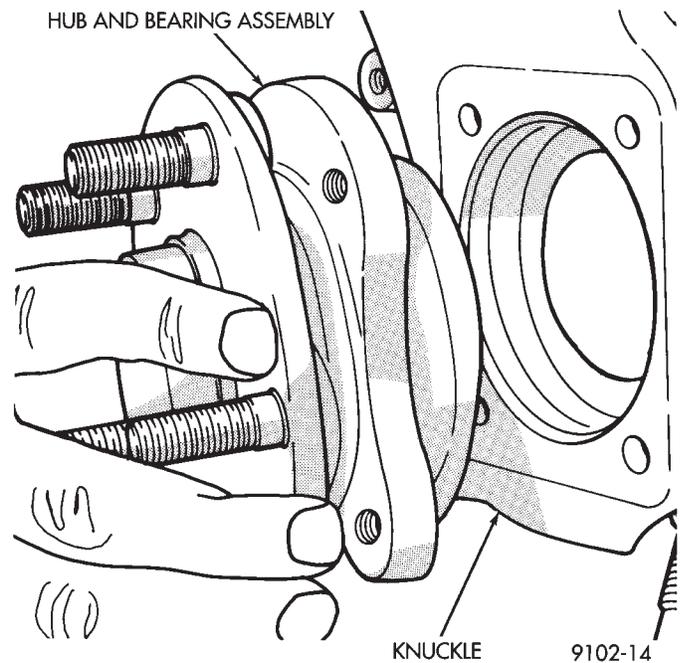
Separate Hub and Bearing Assembly from Knuckle
